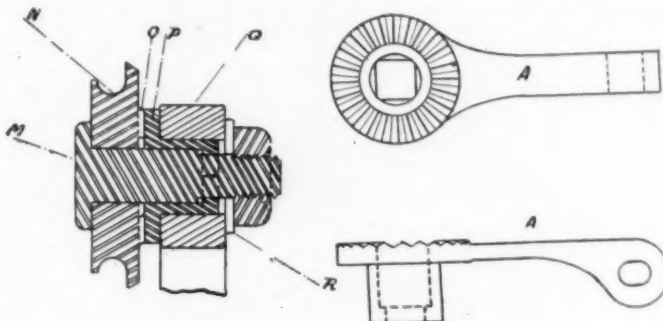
SECTIONAL VIEWS OF FIG. 5.
